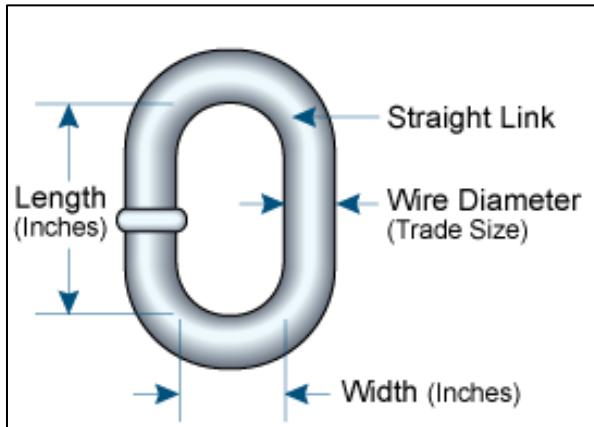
Basic Dimensions On The Actual Optimised Chain Link Used
